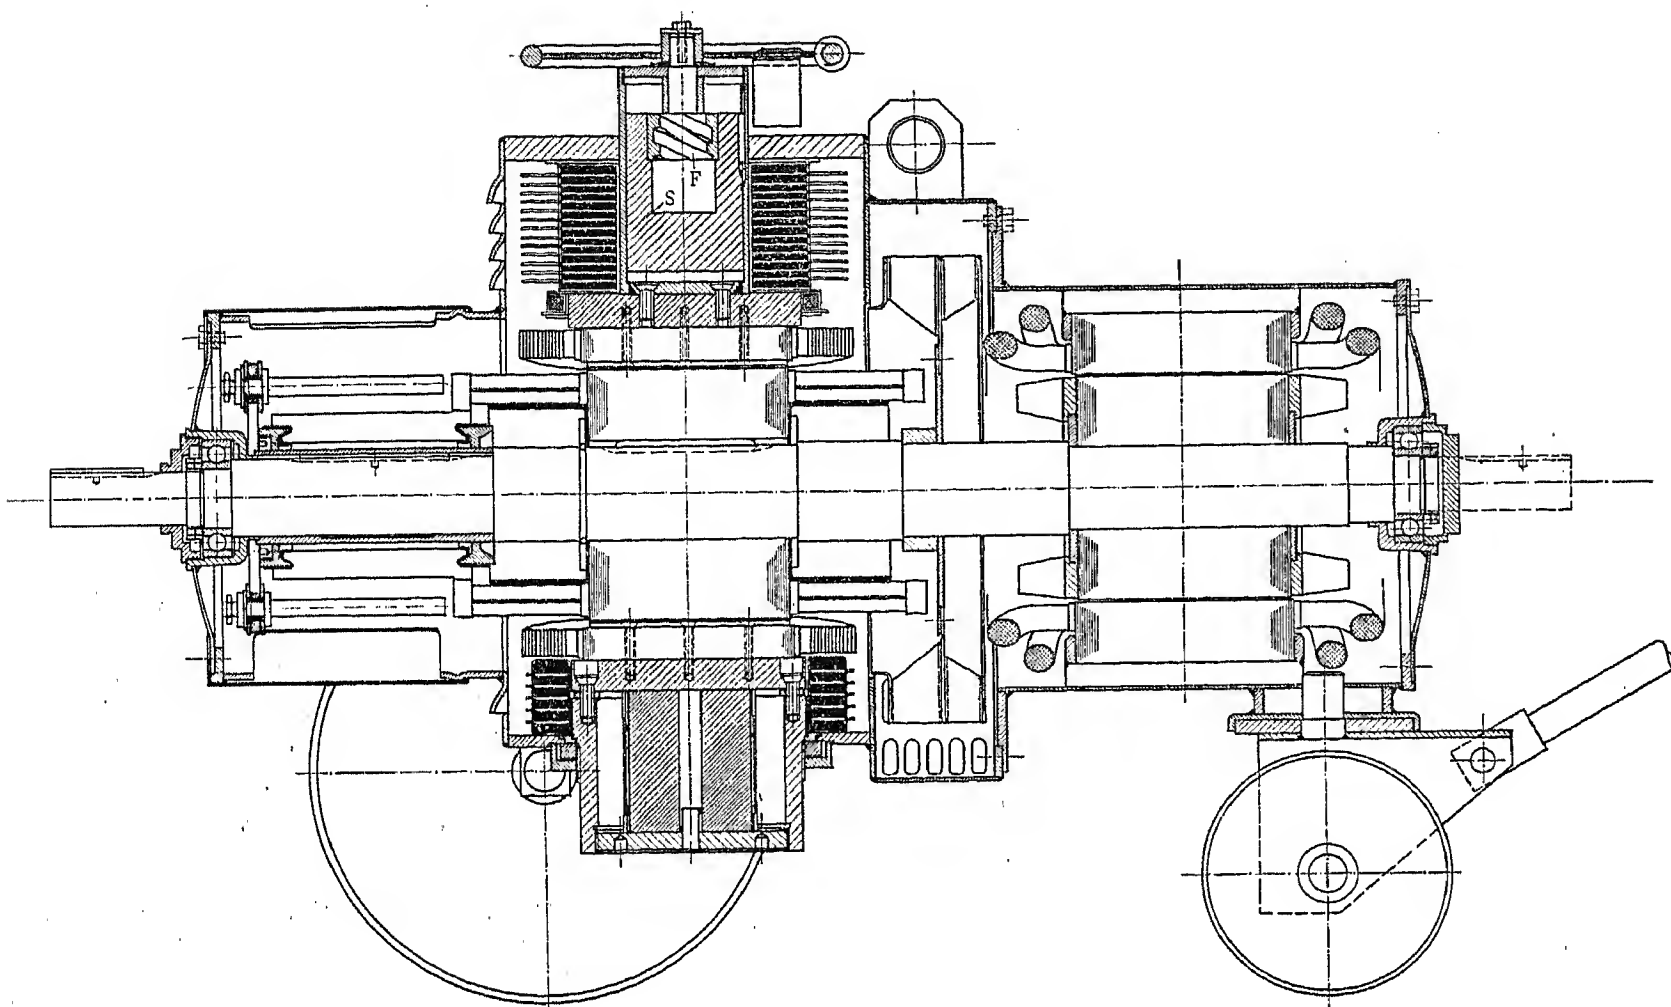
Longitudinal section through portable welding generator and 3-phase driving motor.
